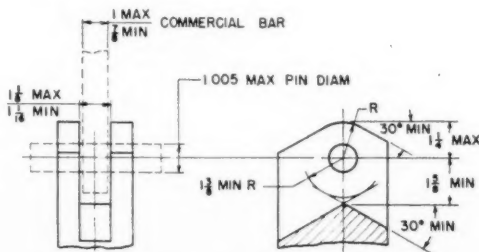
Yoke clearances (rod end) for 8-in-stroke hydraulic cylinder
